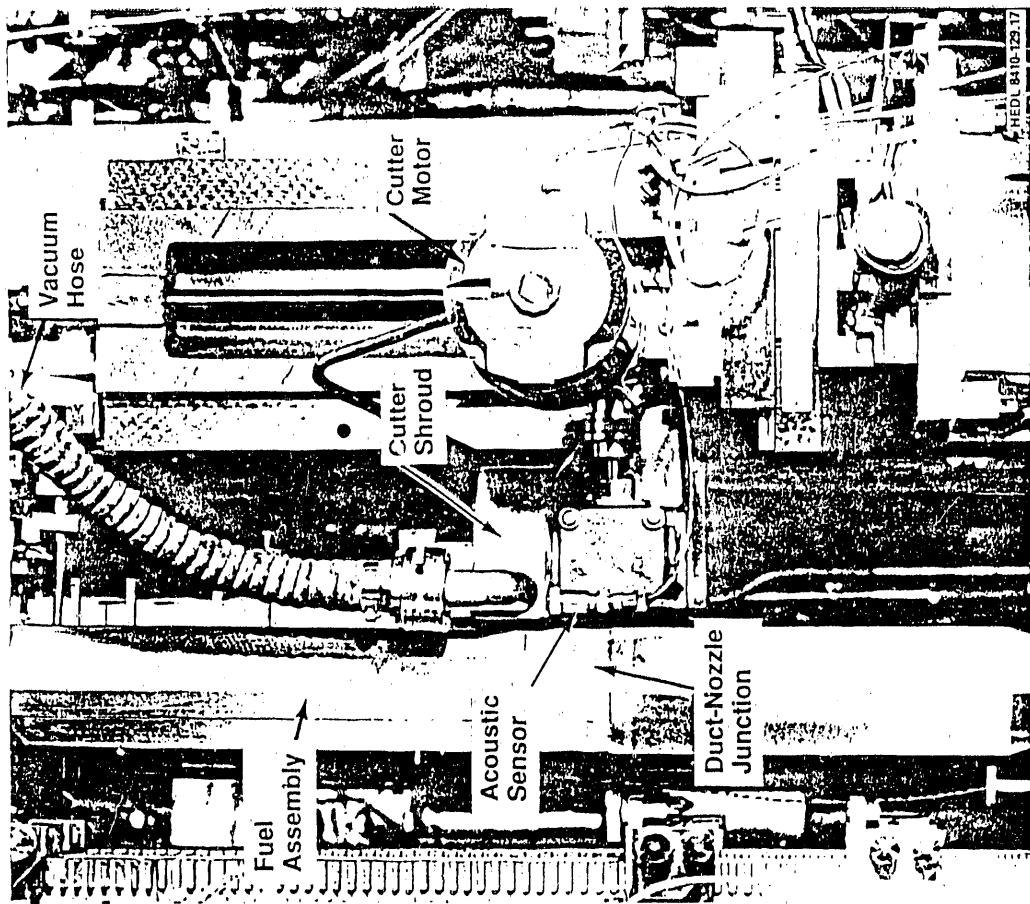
Horizontal Cutter Remotely Operated to Perform Cuts on Each Hexagonal Surface.
